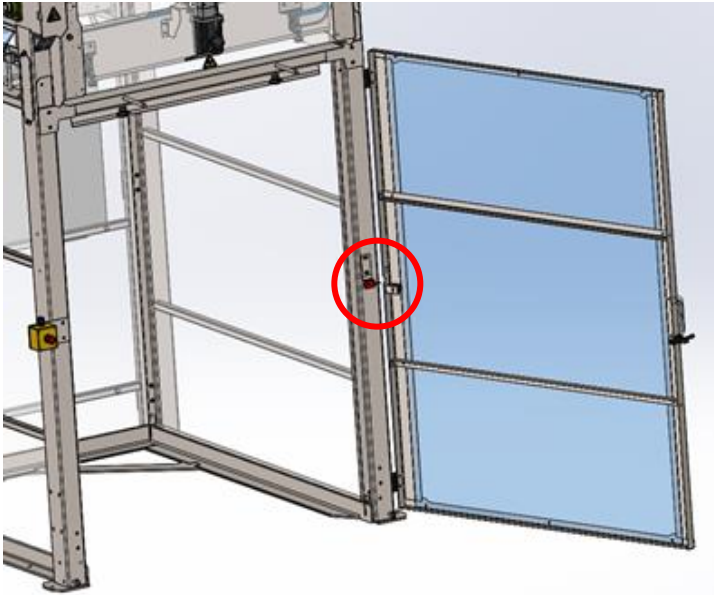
Interlock Mechanism (Highlighted) - Door Open
